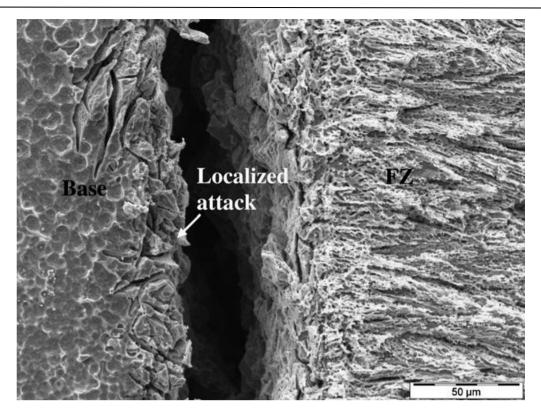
display the surface of an AZ31-Mg specimen that underwent SSRT-LB welding and failed when exposed to the ASTM D1384 solution. The image clearly shows cracks at the melt boundary and localized corrosion in the base region.
